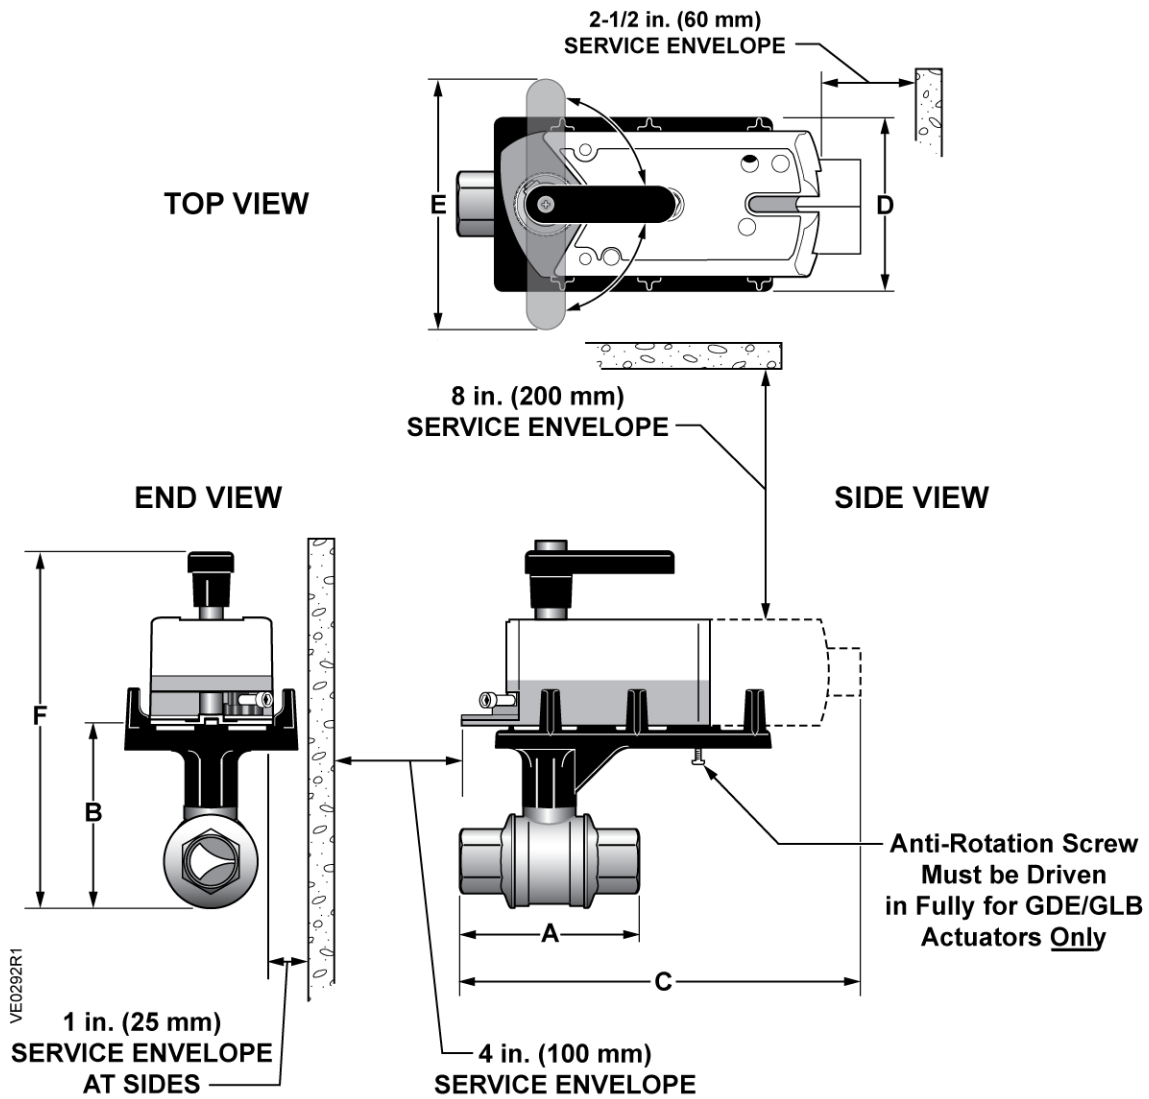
2-Way Ball Valve and Low Profile Bracket with Actuator Dimensions in Inches (Millimeters).
